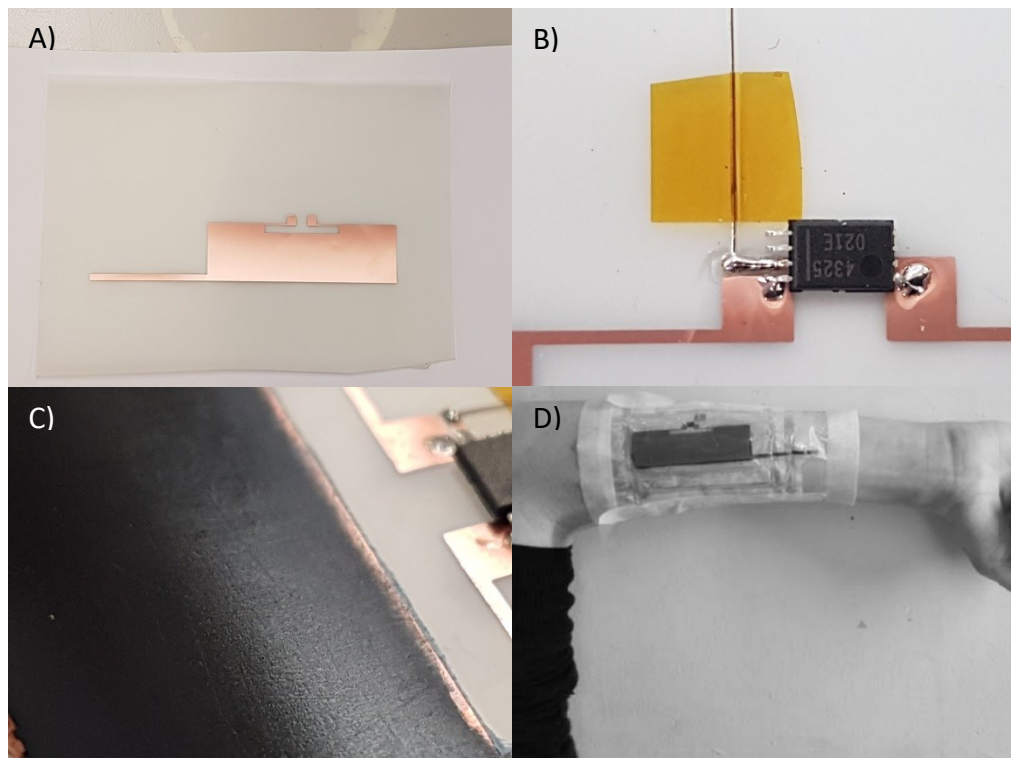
IBAS prototype stages A) antenna etching B) Chip soldering C) spray coated PEDOT:PSS D) final product on body for testing (reprinted with permission [8])
